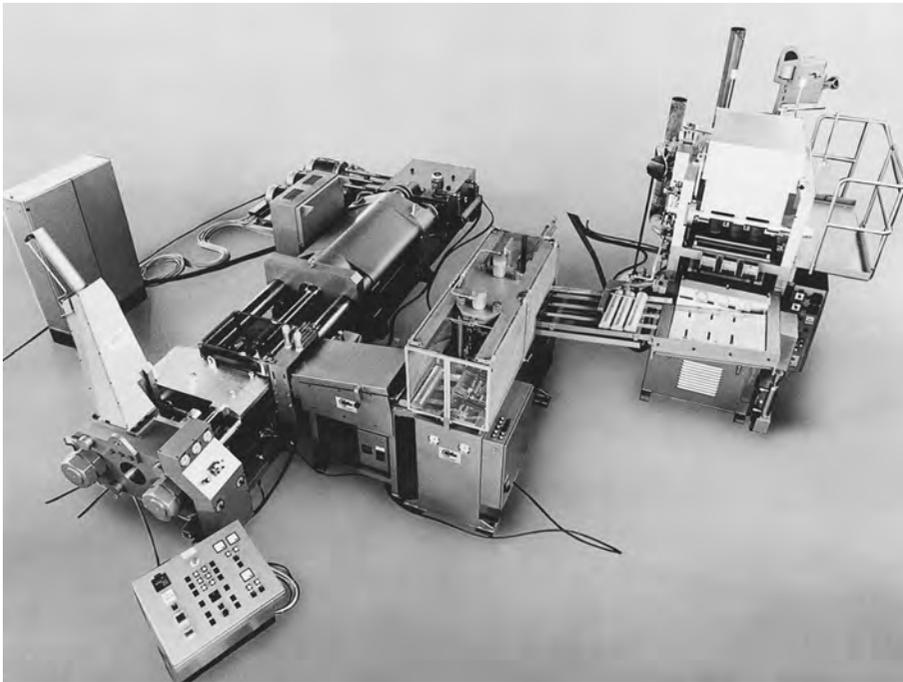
Modern integrated fully automatic 5000 kN extrusion plant for the production of bar, wire, tube, and sections in lead and tin alloys complete with casting oven, triple billet casting plant, hot-billet shear, and oil hydraulic long-stroke extrusion press (Source: Collin)
